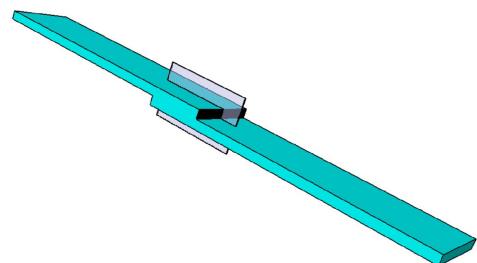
Plane along which cuts were made in the welded specimen for microscopy analysis
